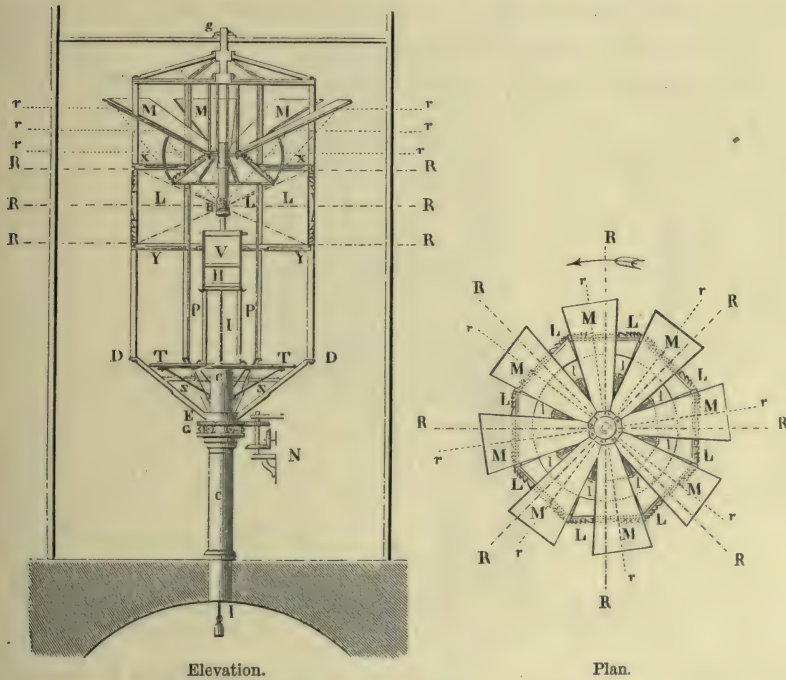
Fresnel's first lenticular apparatus : in elevation and plan.
